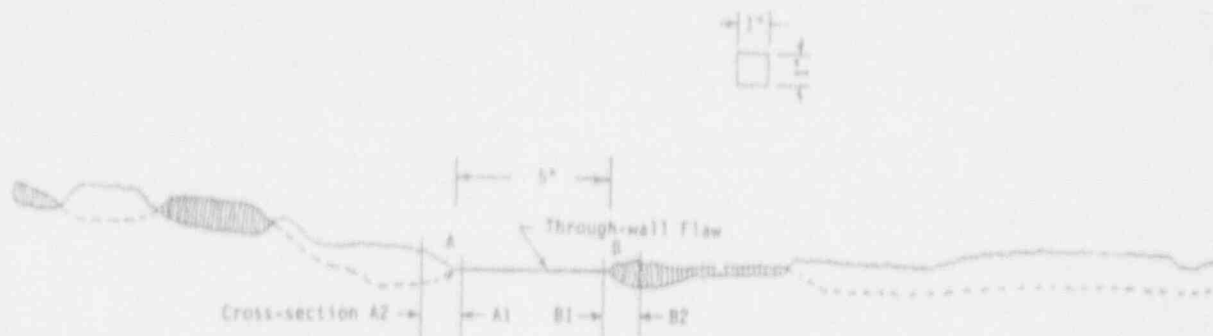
Sketch of fracture path in pipe test 11.1.23
